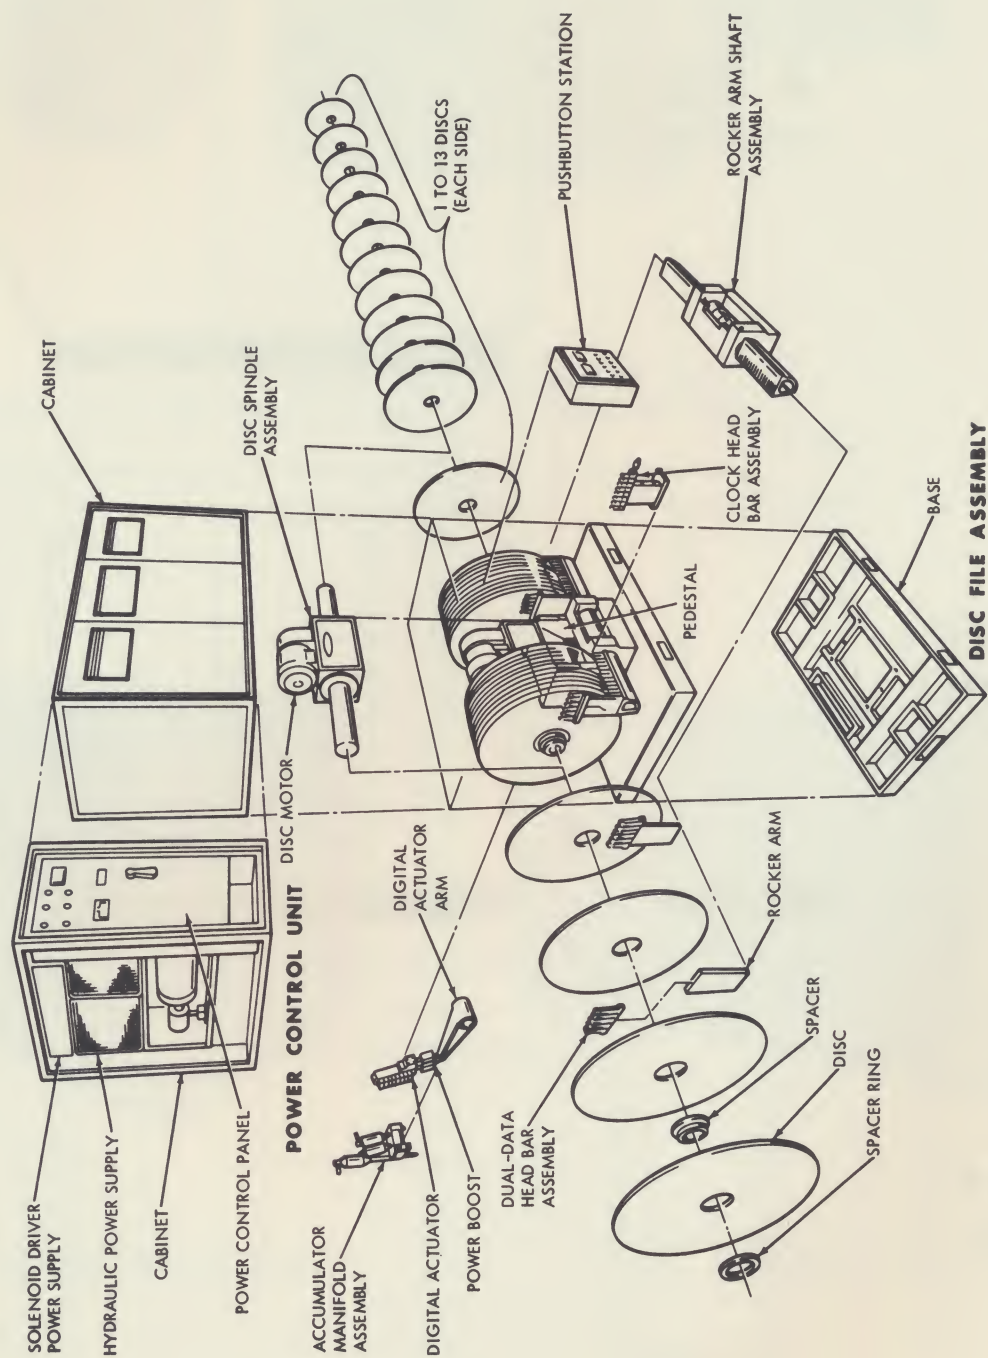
EXPLODED VIEW OF A BRYANT SERIES 4000C DISC FILE
